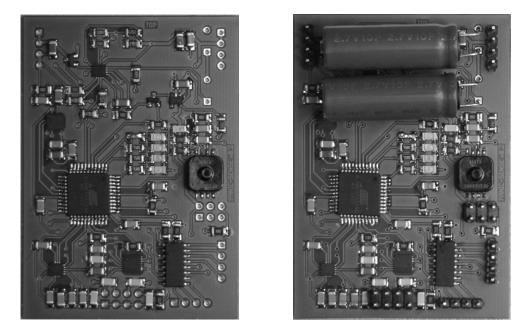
Panic-sense v0.2 PCB with only SMD parts (left), and fully assembled with SMD and THT parts (right).
